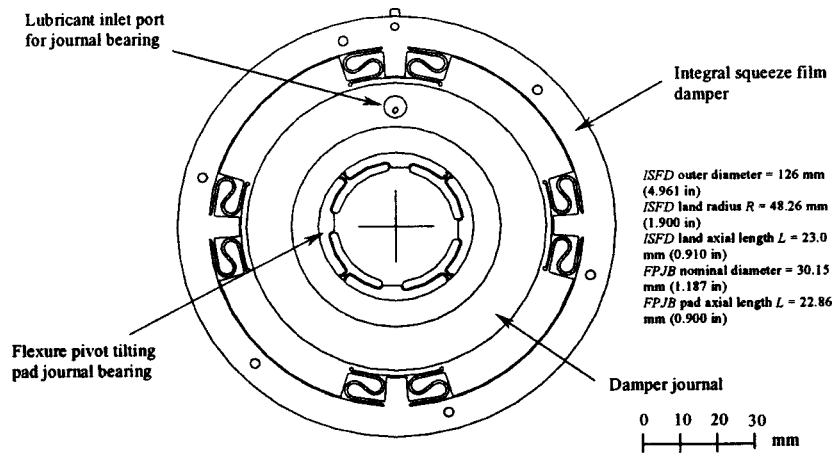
Configuration of integral squeeze film damper and flexure pivot tilting pad journal bearing
